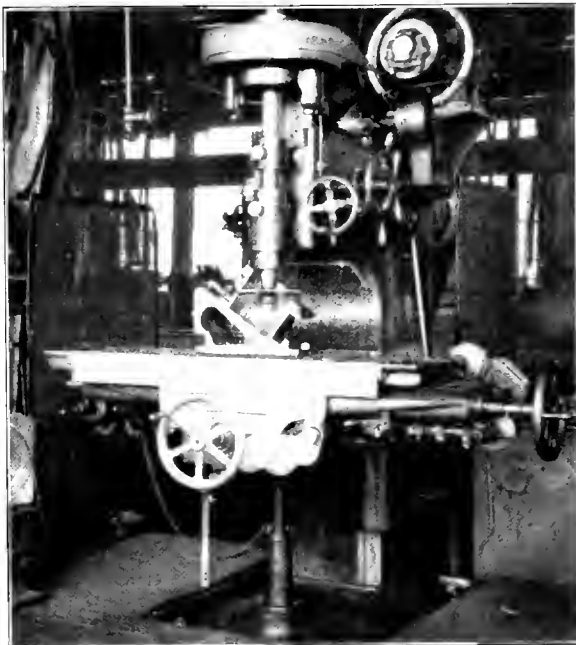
Milling the Oil Grooves in the Main Rod Brasses
